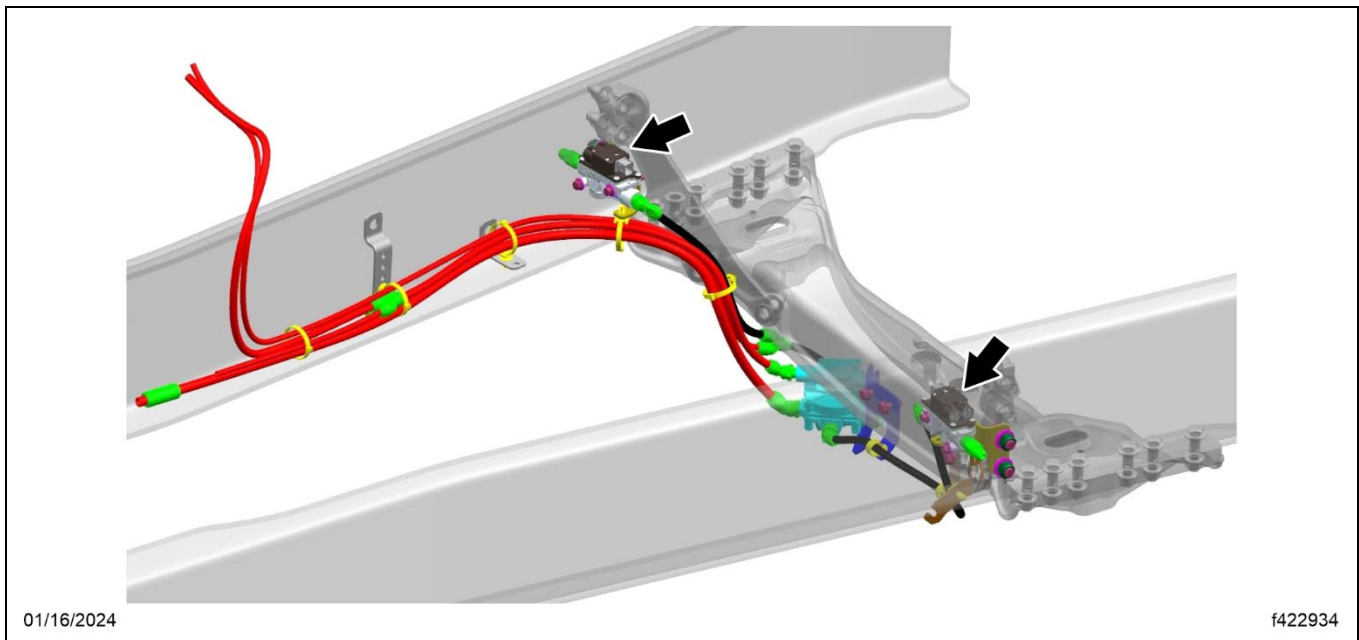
, Modulator Valve Mounting Inside the Frame Rails
